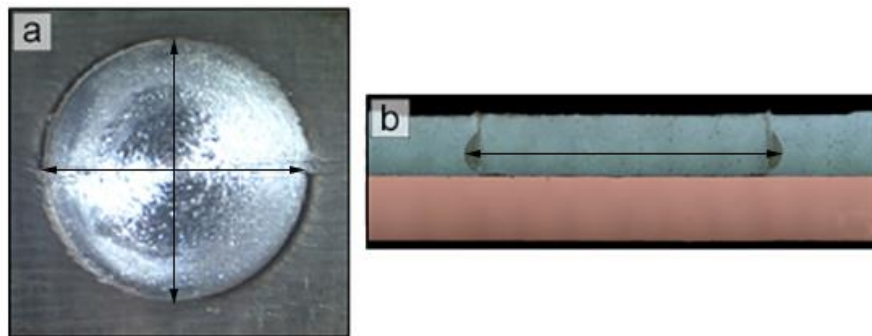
Bonded width measurement procedures, according to the: (a) fracture surface and (b) cross section of the welded joint.
